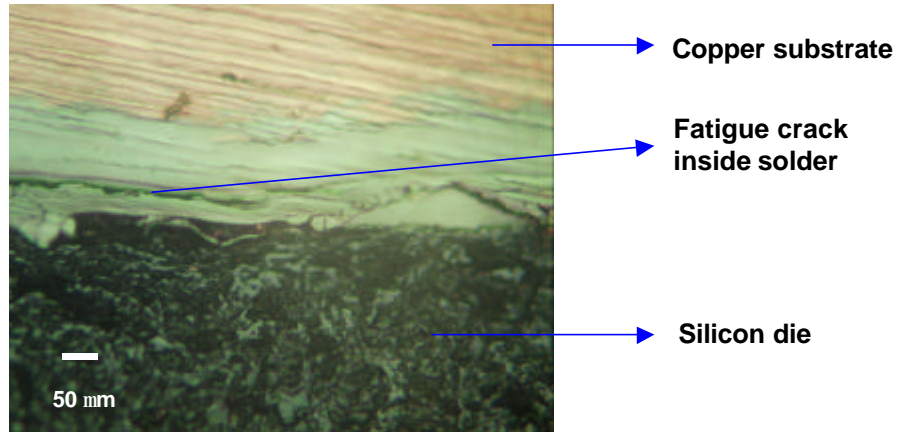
Fatigue cracks inside solder at 50X magnification
